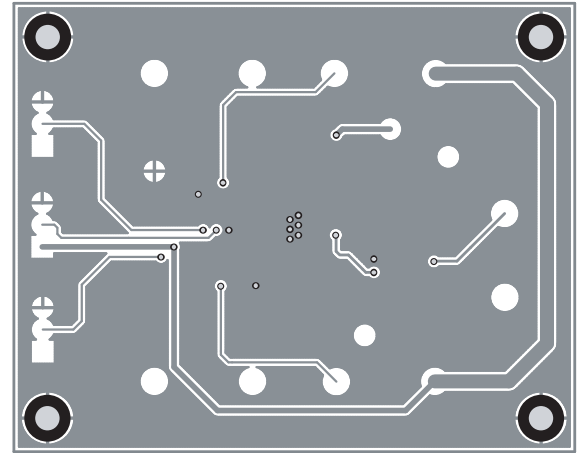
AAT2784 Evaluation Board Solder Side Layout
